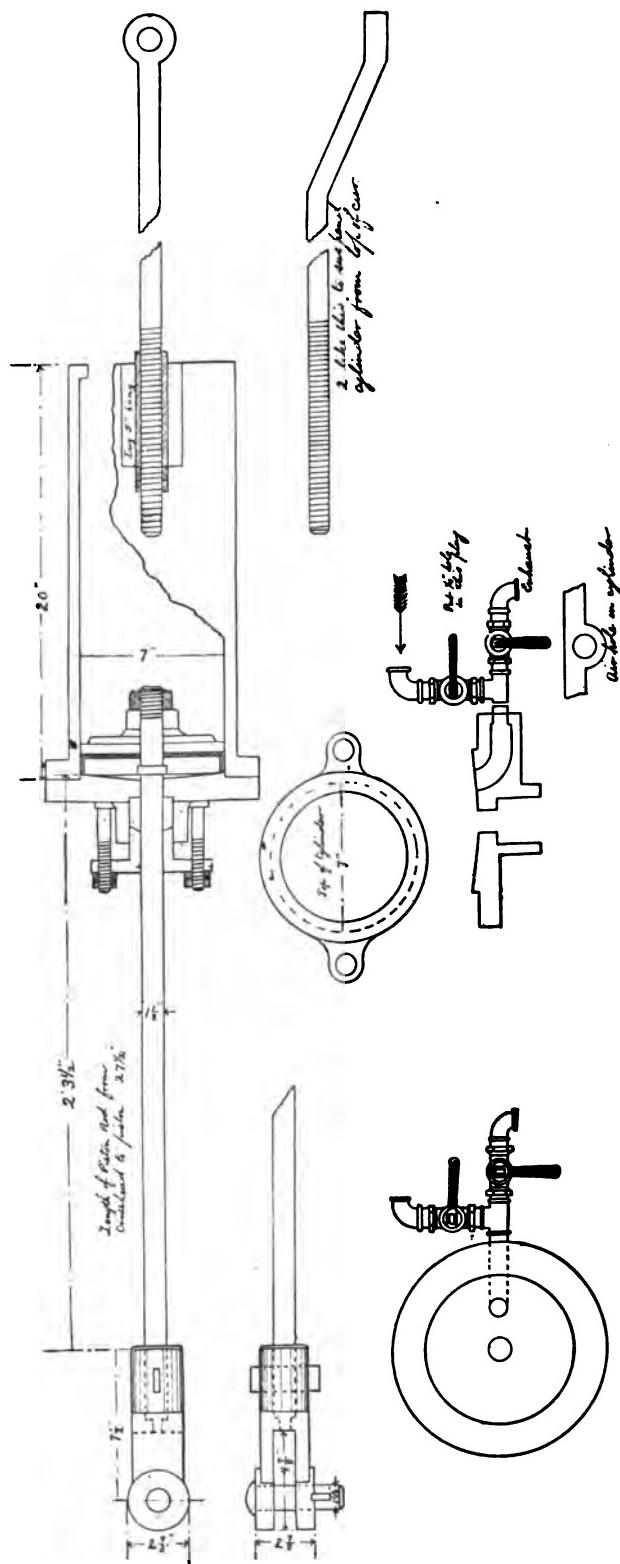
FLANGING CAR, DETAILS OF HOISTING ATTACHMENT.
